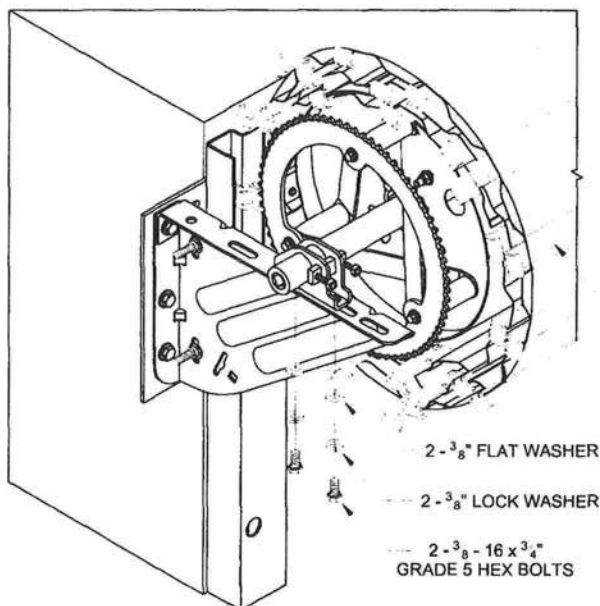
STAMPED AXLE SUPPORT TO BRACKET
